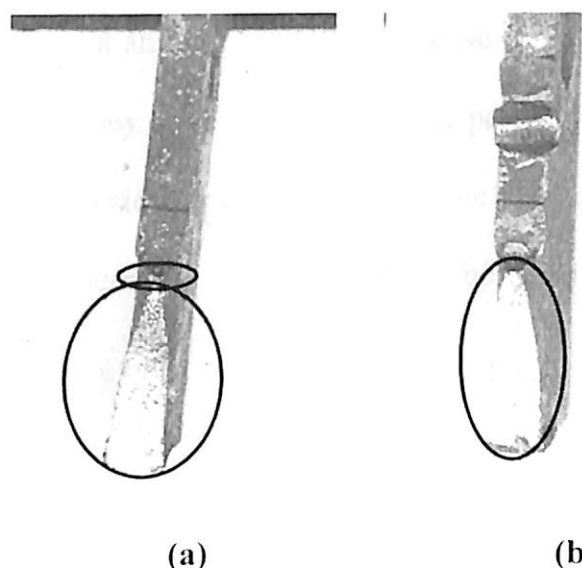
Fracture surface of broken open up specimens.
